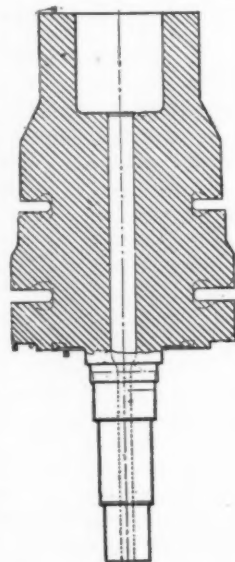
FINISHED FORGING FOR COUPLING-END HALF OF A TURBINE SPINDLE
